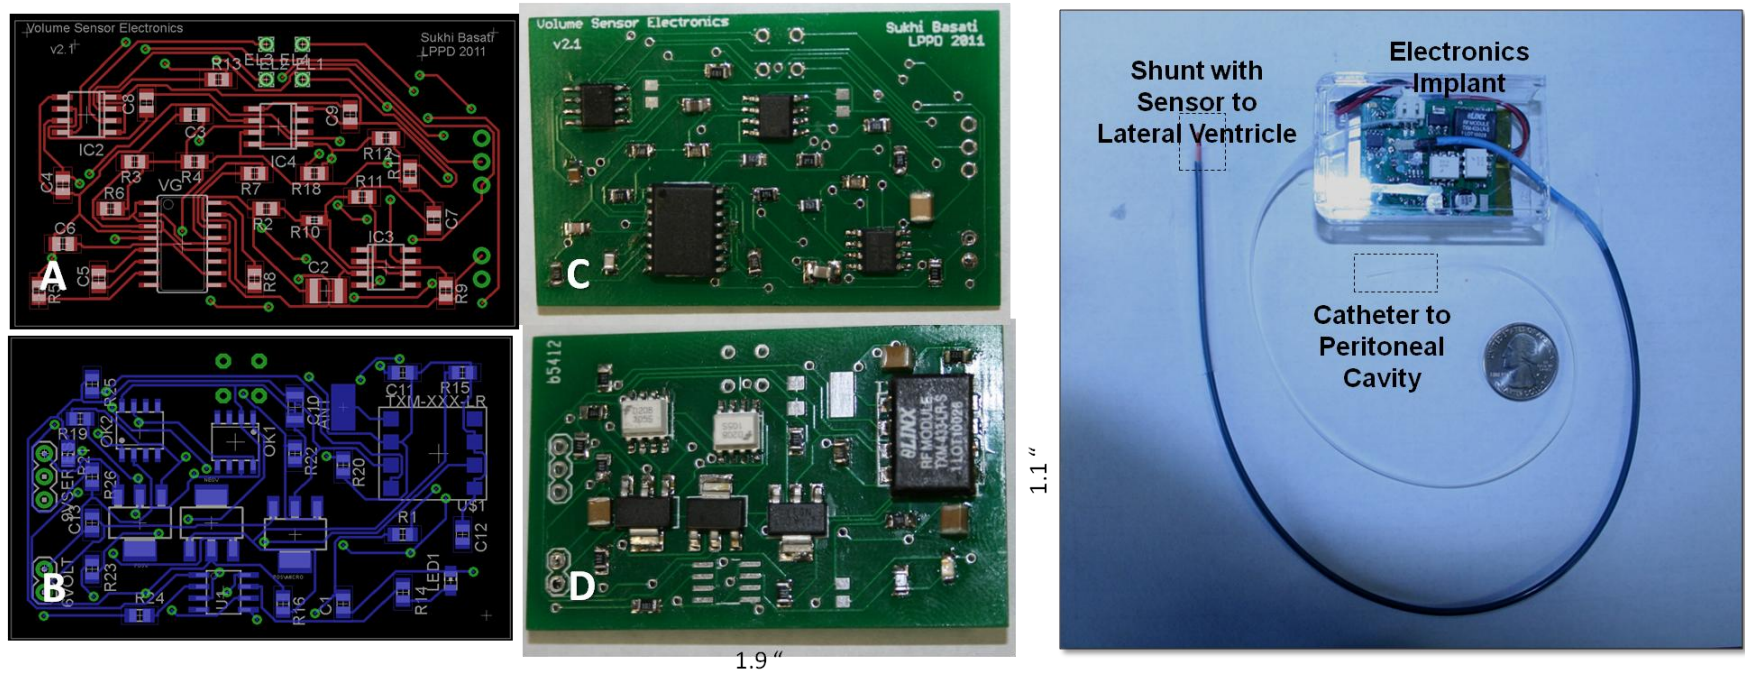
Instrumentation Fabrication and implantable system prototype. Frames A-B shows the component layout on the top and bottom side respectively. Frames C-D shows the fabricated instrumentation. The figure on the right shows a prototype implantable system for volume monitoring.
